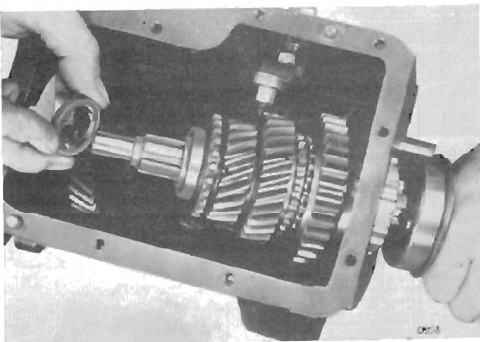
Assembling the thrust washer with its scrolled face towards the gears
